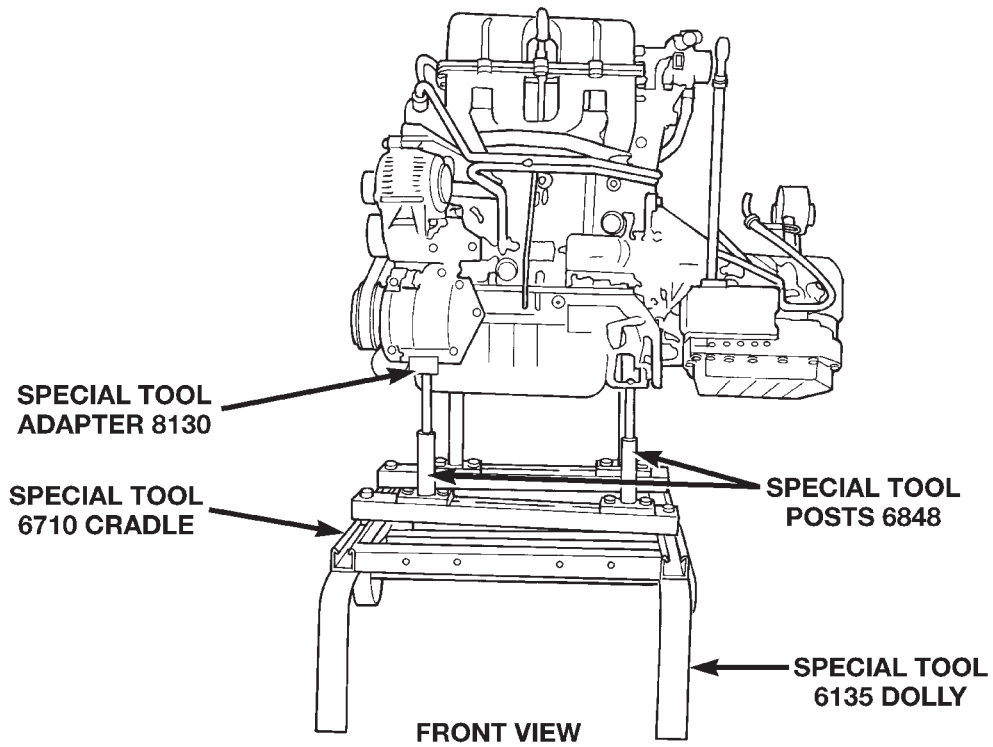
Positioning Engine Cradle Support Post Mounts—Typical
